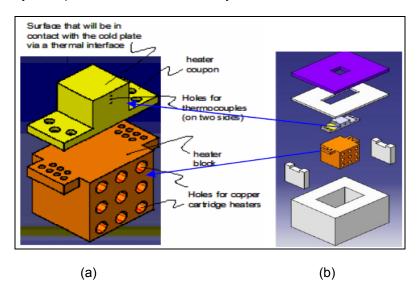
Heat sink tester arrangement (a) Heat sink tester layout (b) Exploded view of the assembly
